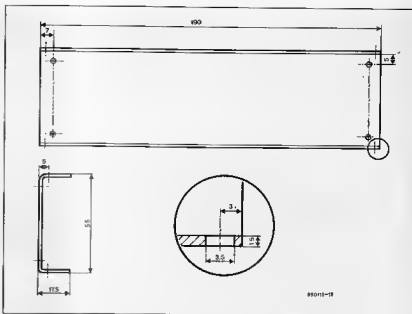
Construction details of the aluminium bracket that holds the PCB.
